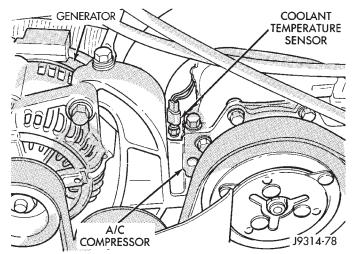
Engine Coolant Temperature Sensor—5.2L/ 5.9L Engines
